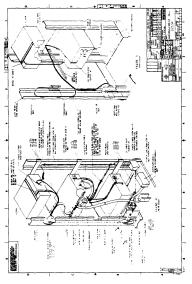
Sample of An Arrangement Drawing (Sheet 3 of 5)
